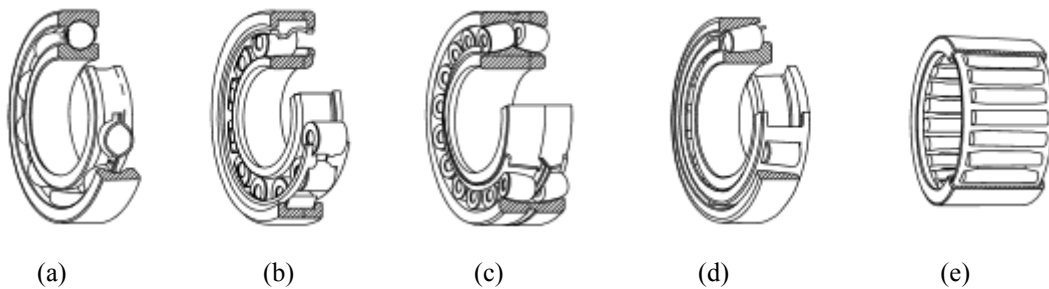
Types of rolling bearings (Figures from reference [3]). (a) Ball; (b) Cylindrical; (c) Spherical; (d) Tapered; (e) Needle.
